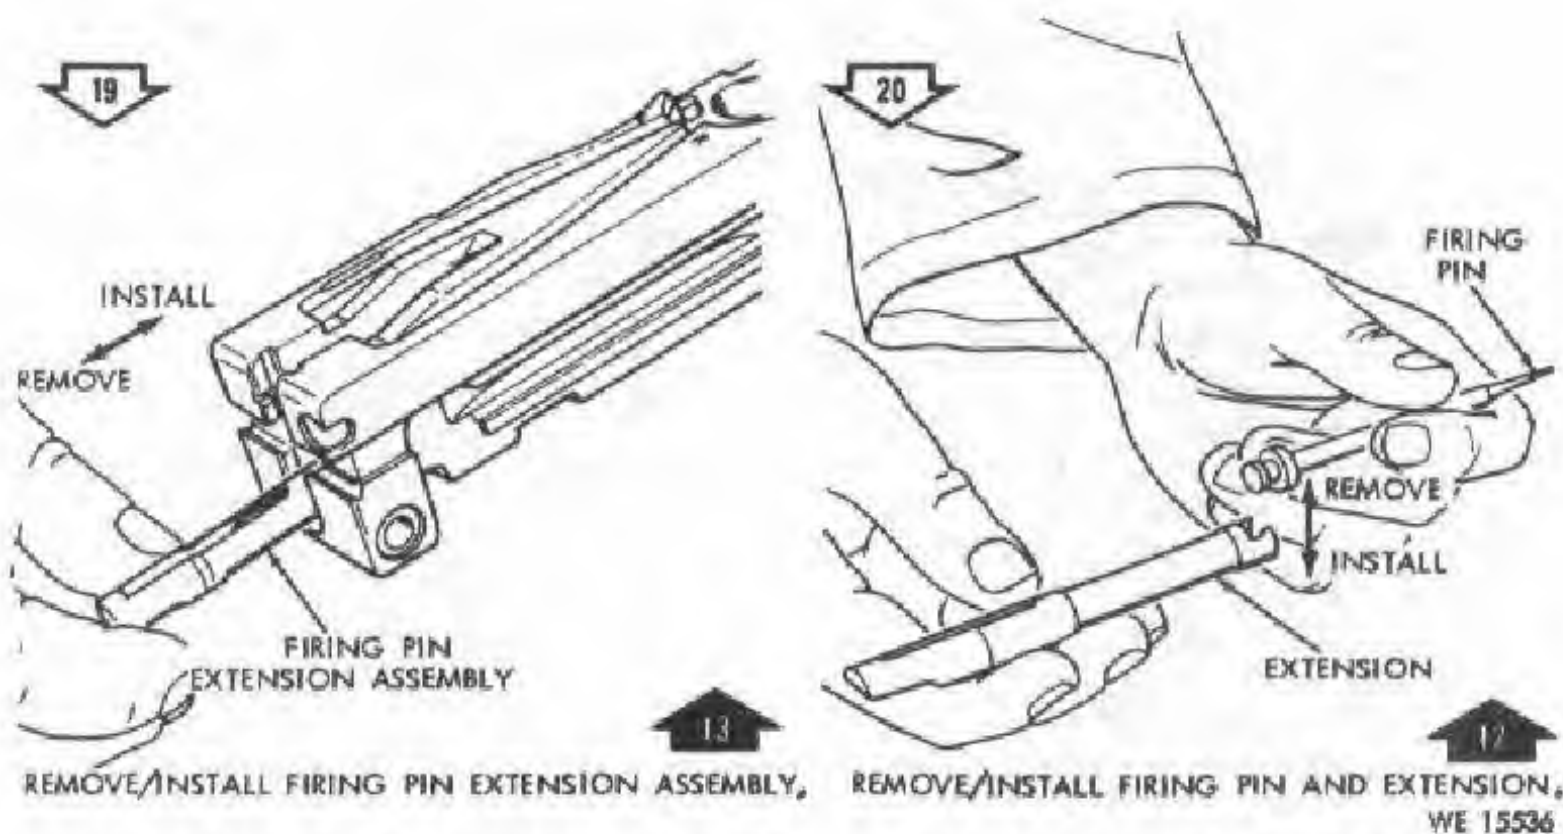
Disassembly/assembly of Caliber .50 Machine Gun, M2. (12 of 20)
